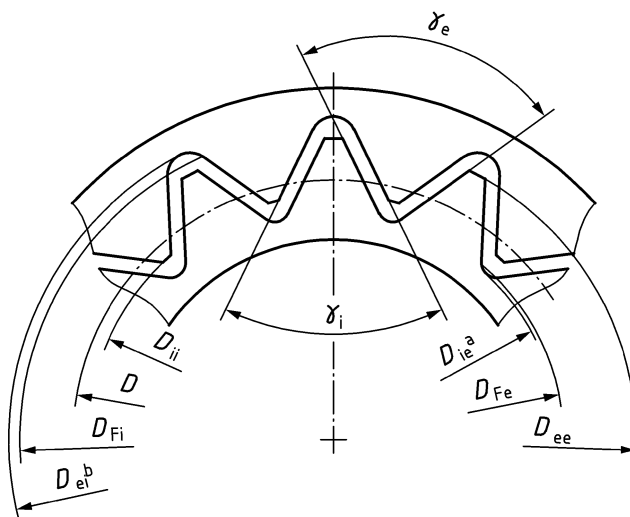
Mating a straight-flank serrated hub to a shaft with involute flanks
